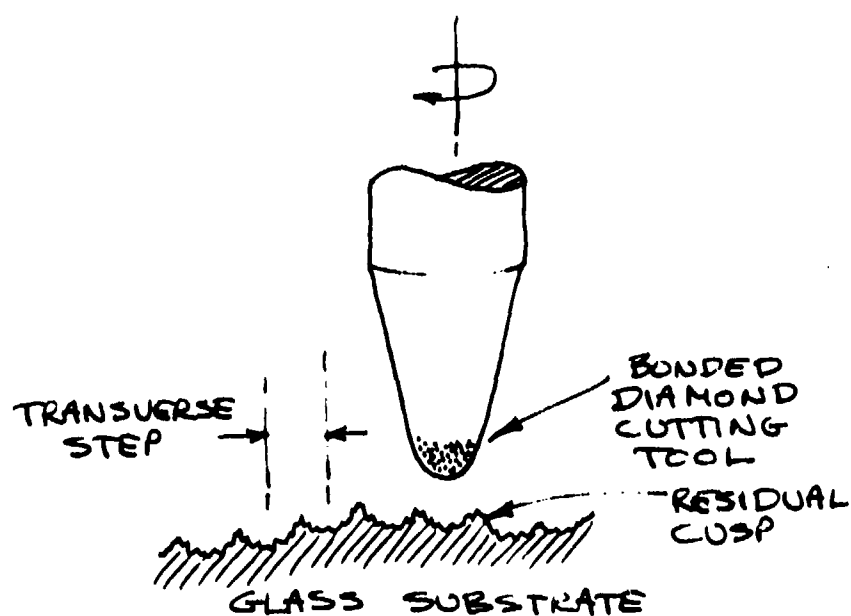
Machining of a scaled-up correction plate, using a spherical-tipped tool with bonded diamond grit.
